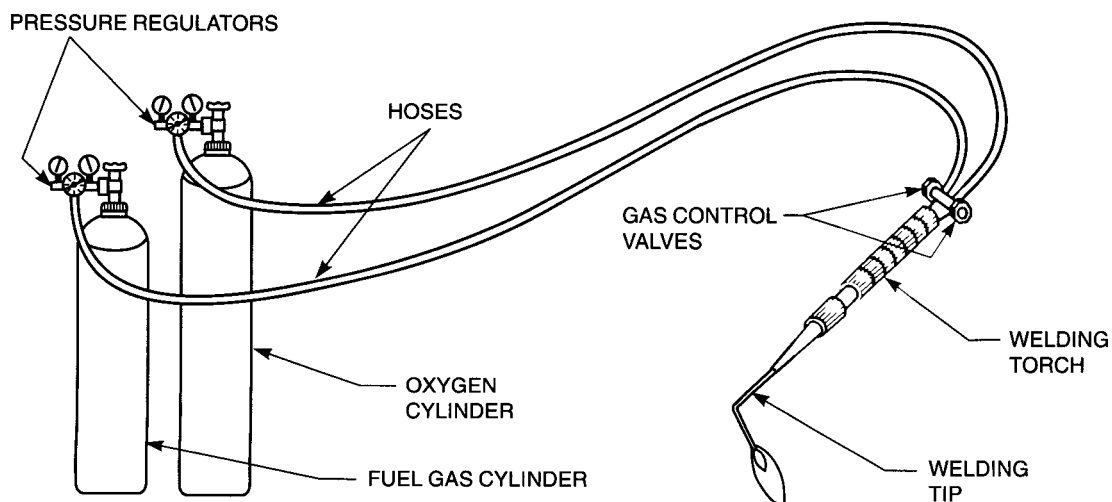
Basic Oxyfuel Gas Welding Equipment
